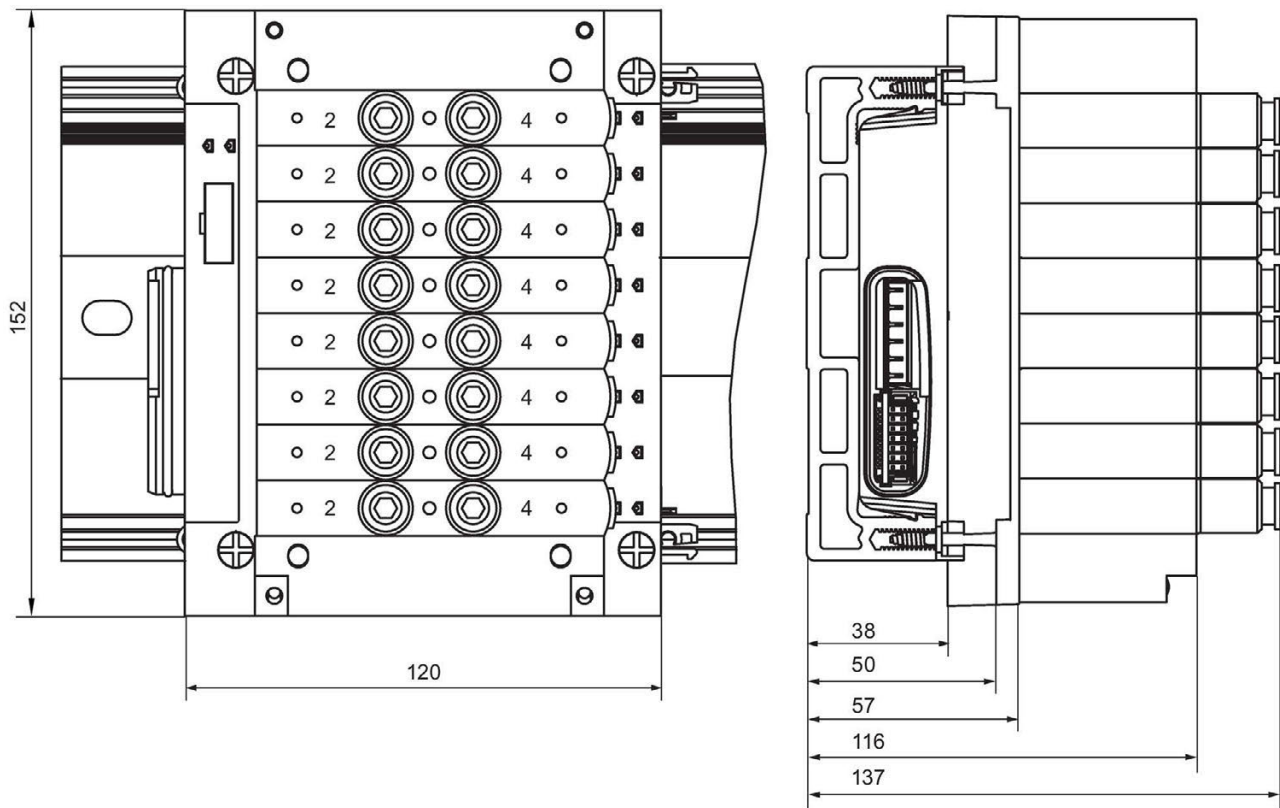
Dimension drawing of 16 DO DC 24V CPV14 pneumatic interface module with FESTO valve terminal CPV14 on compact type rack
